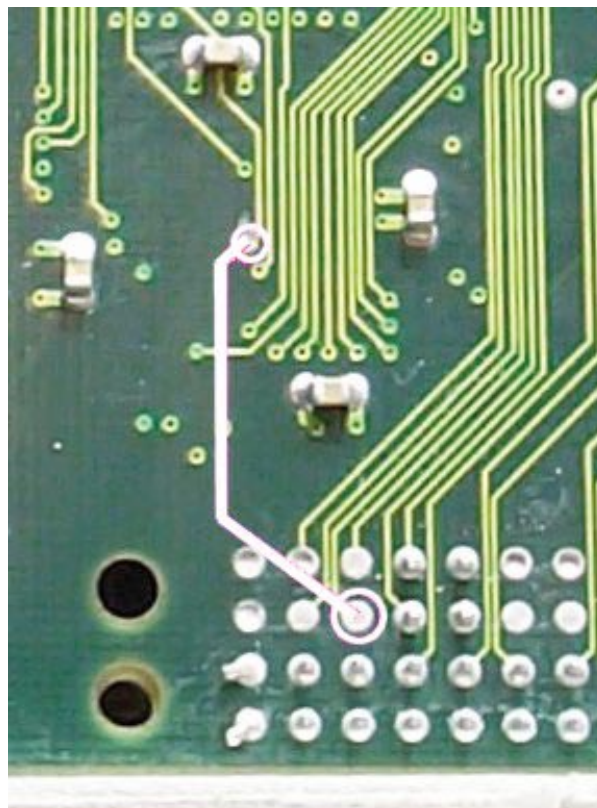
Picture Showing the Via and Track after the Solder Resist has Been Scraped Off
